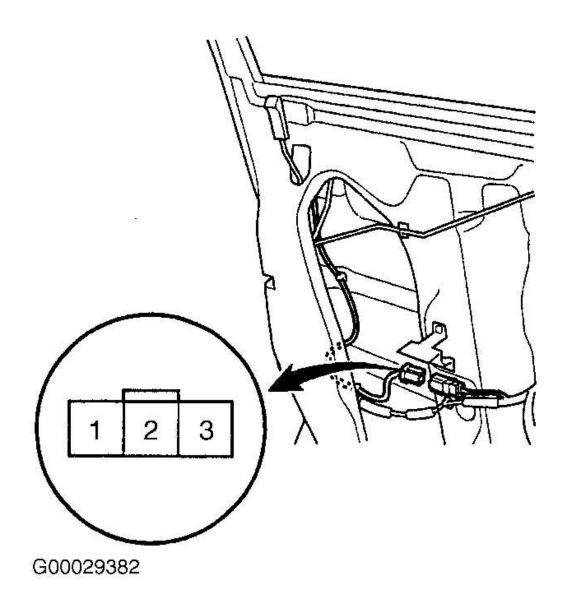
Identifying Driver's Door Key Cylinder Switch Connector & Terminals Courtesy of AMERICAN HONDA MOTOR CO., INC.
